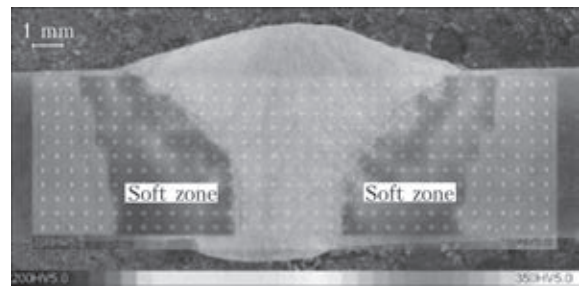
Soft zone due to welding of high-strength steel [2]
